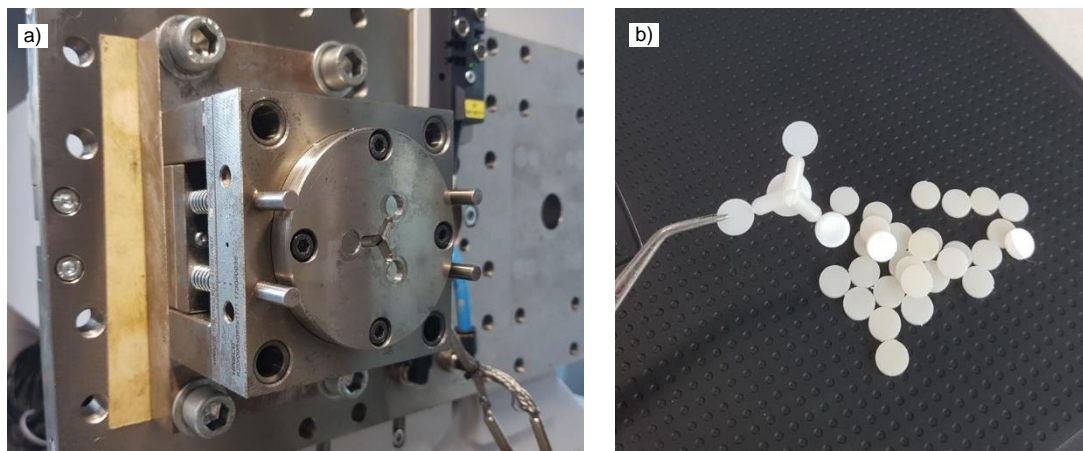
a) Mould tool for disc preforms, b) ABS disc preforms.
